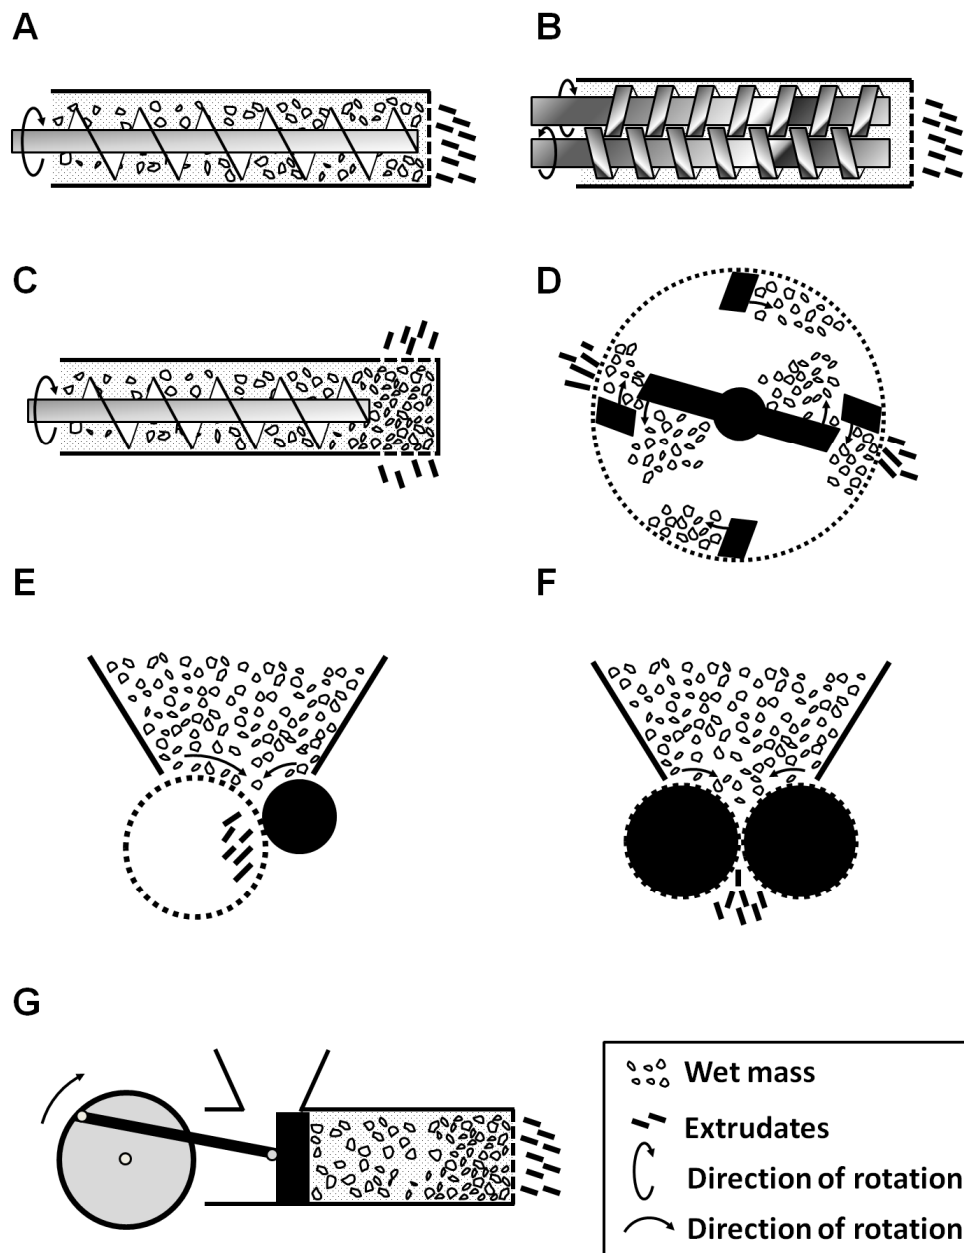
Schematic diagram of (A) single screw axial extruder, (B) counter rotating twin-screw extruder, (C) single screw radial extruder, (D) NicaTM extruder, (E) rotary-cylinder extruder, (F) rotary-gear extruder and (G) ram extruder
